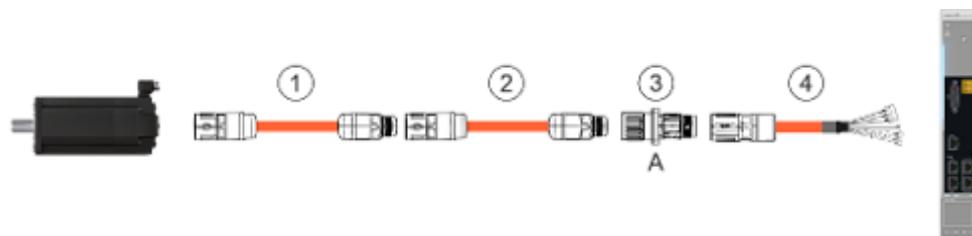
Cable with extension and panel feed-through (A; M23, RHS2305/A03, R911384340) ⇒ 4 cable segments
